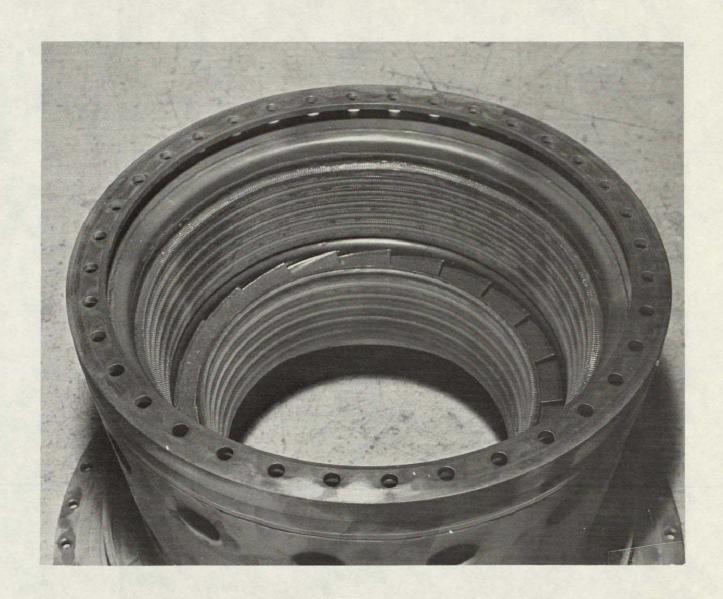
No. 4B Pressure Balance Seal, Overall View.
